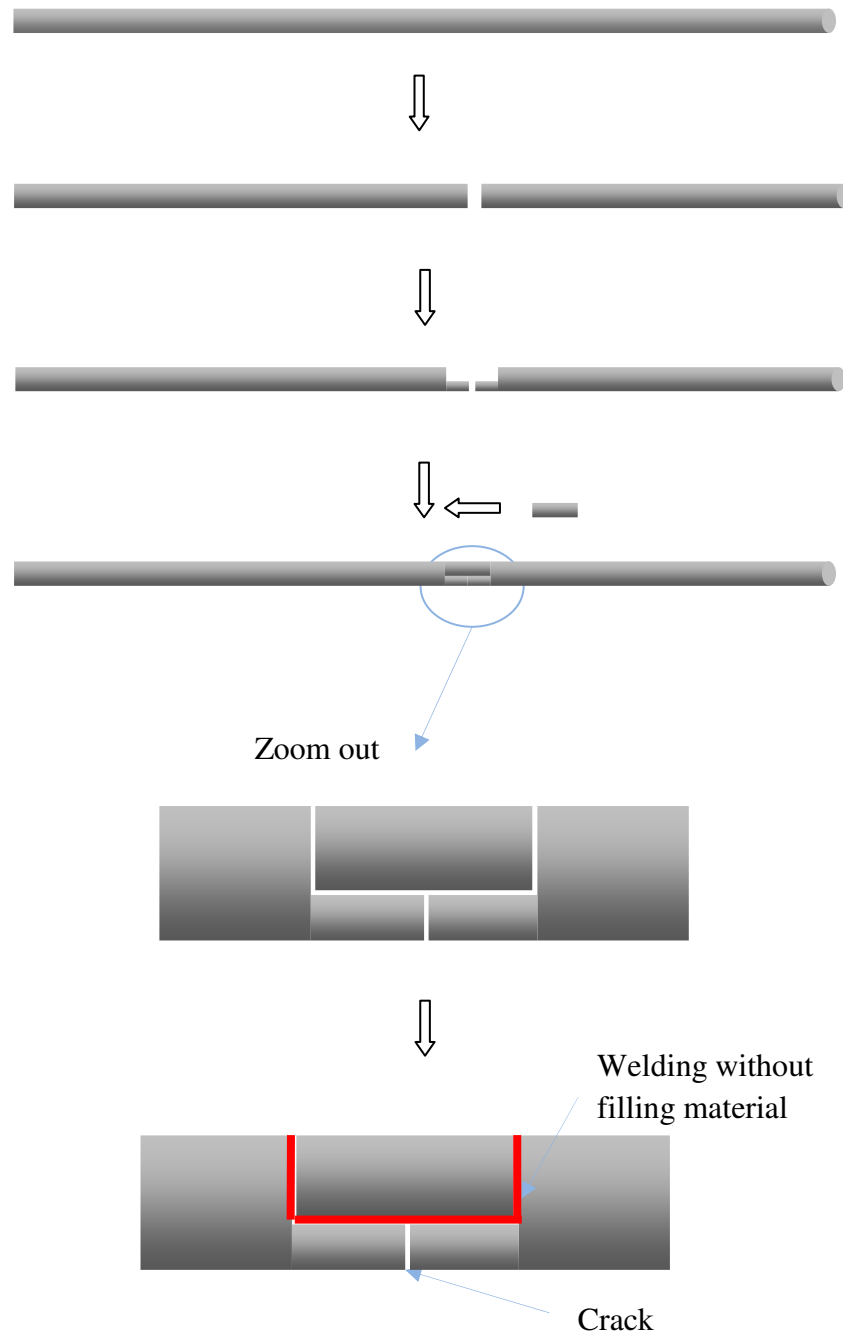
A schematic of welded shaft crack fabricating process
